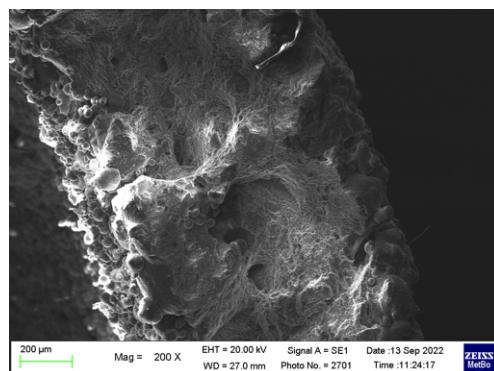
Final fracture surface of a 1.2 mm thick specimen T6 treated.
